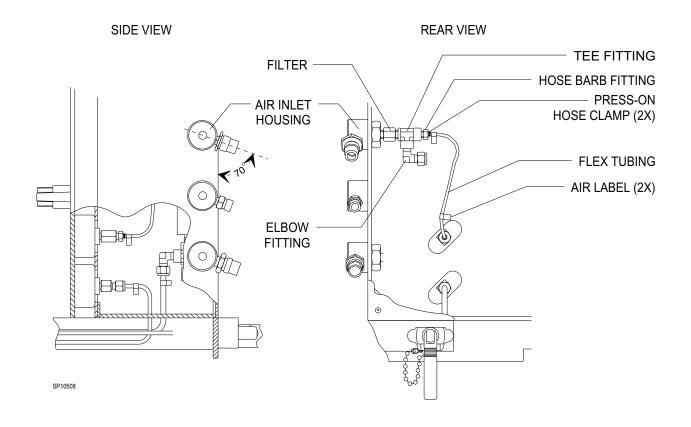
AIR PIPE LINE INLET ASSEMBLY
